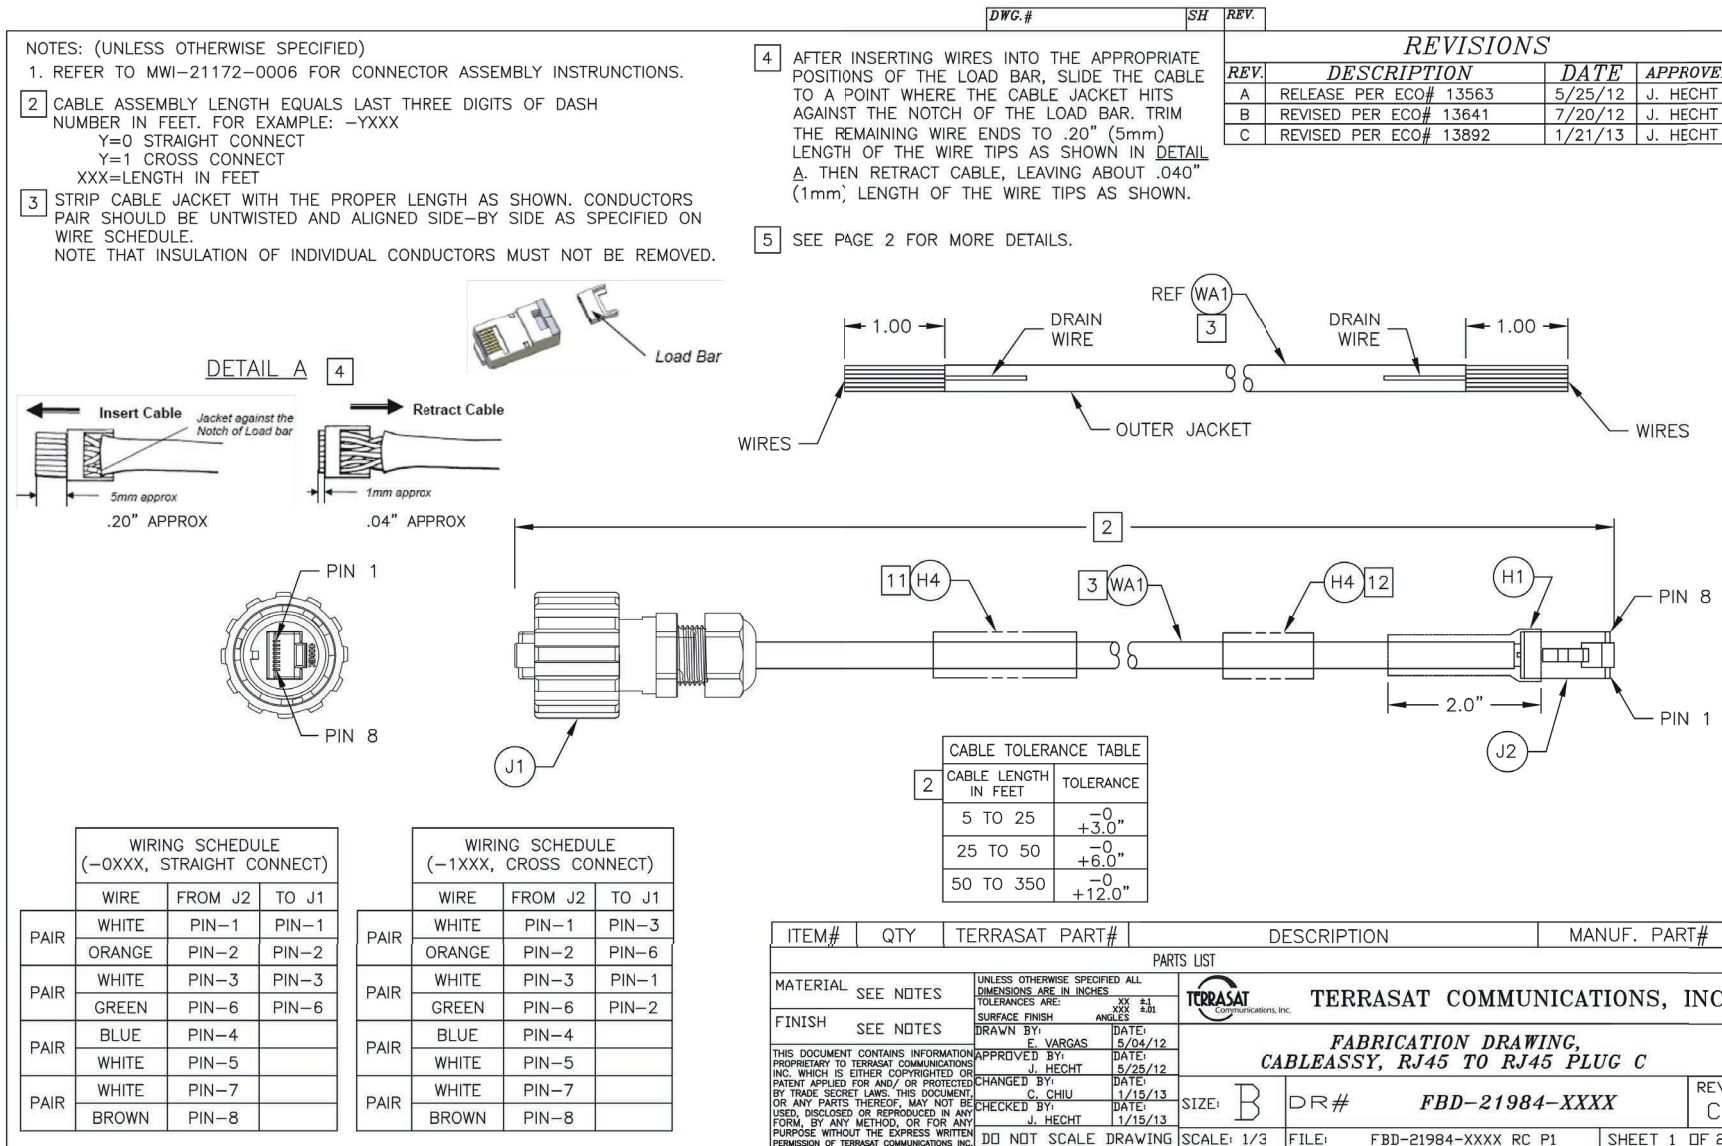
Fabrication Drawing, FBD-21984-XXXX, Rev C, page 1 of 2
